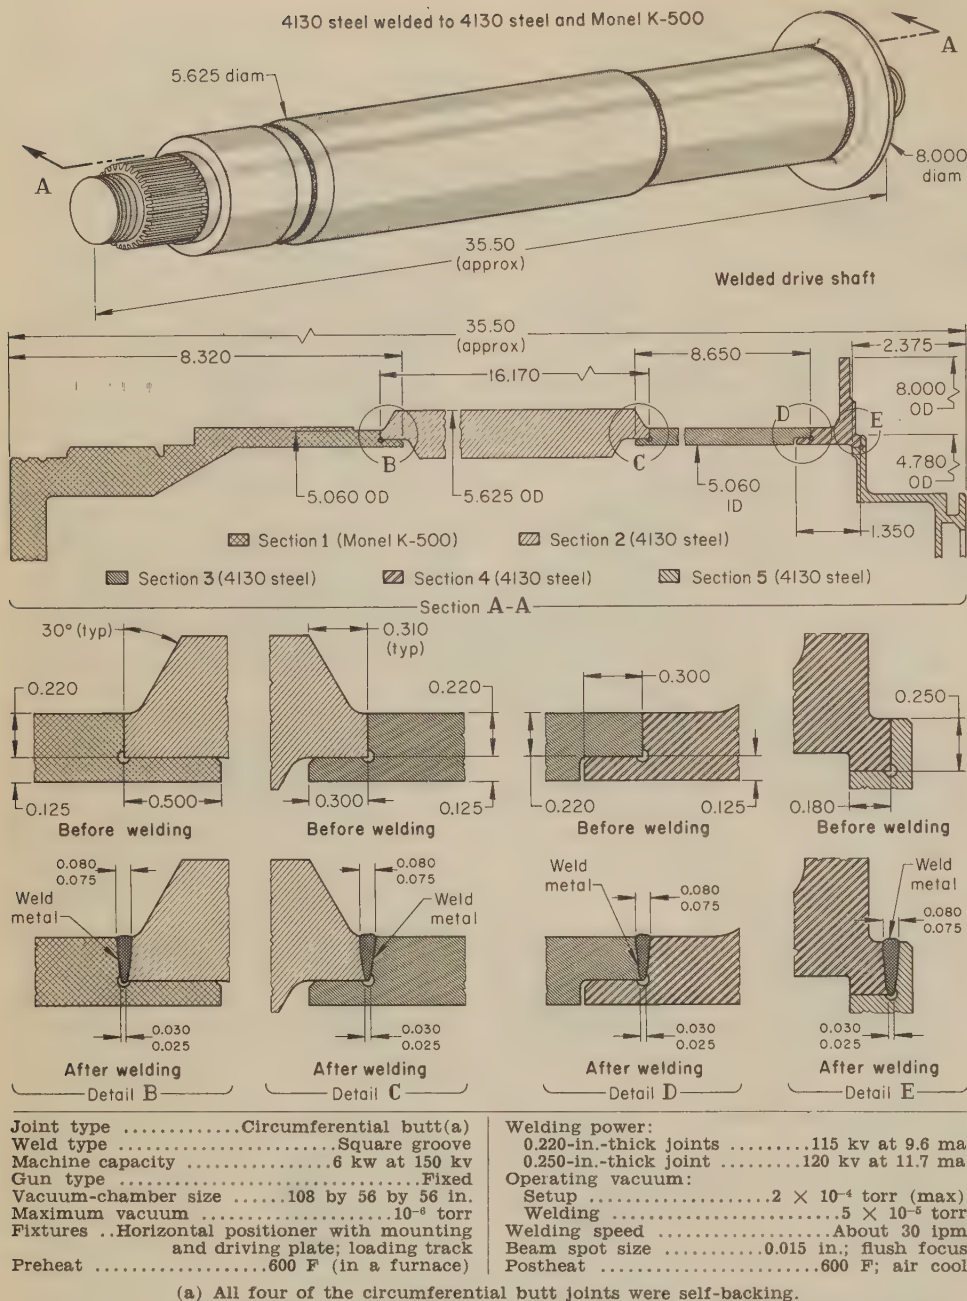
Five components of a hydrofoil drive shaft that were shrink fitted and electron beam welded to a tolerance of  $\pm 0.002$  in. for concentricity and straightness (Example 483)
